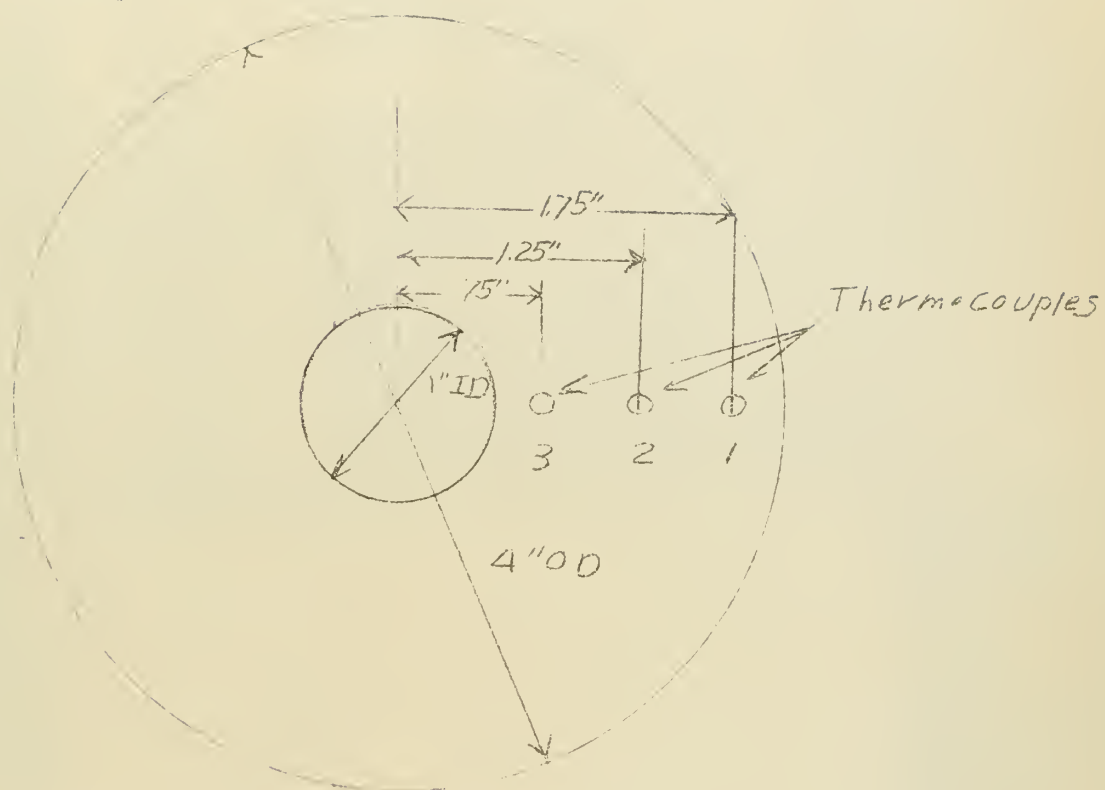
Circular Cylinder Model Showing Location of Thermocouples
